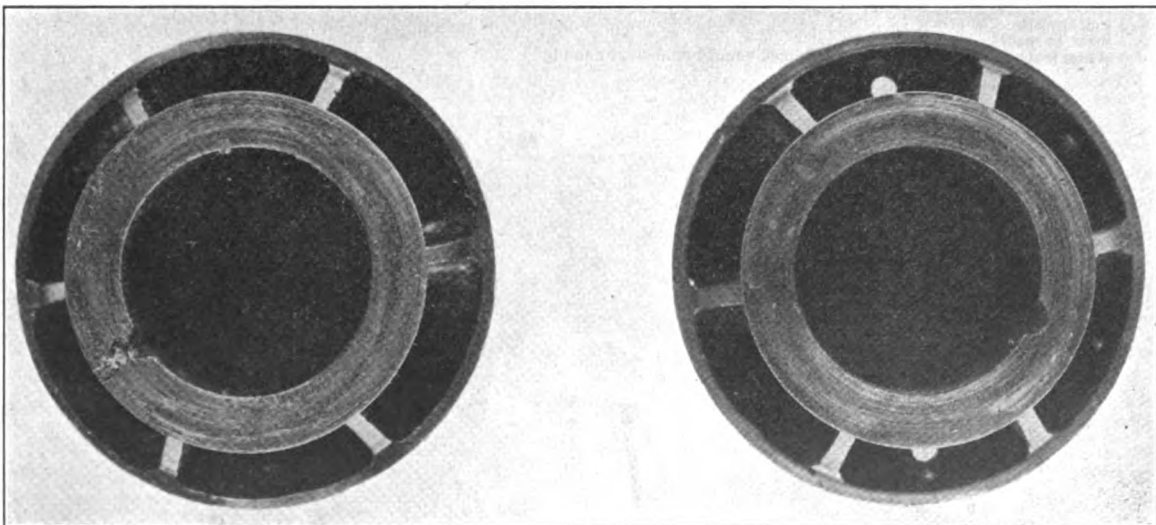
Camshaft drive-shaft bearings (lower) after preliminary runs on dynamometer.
